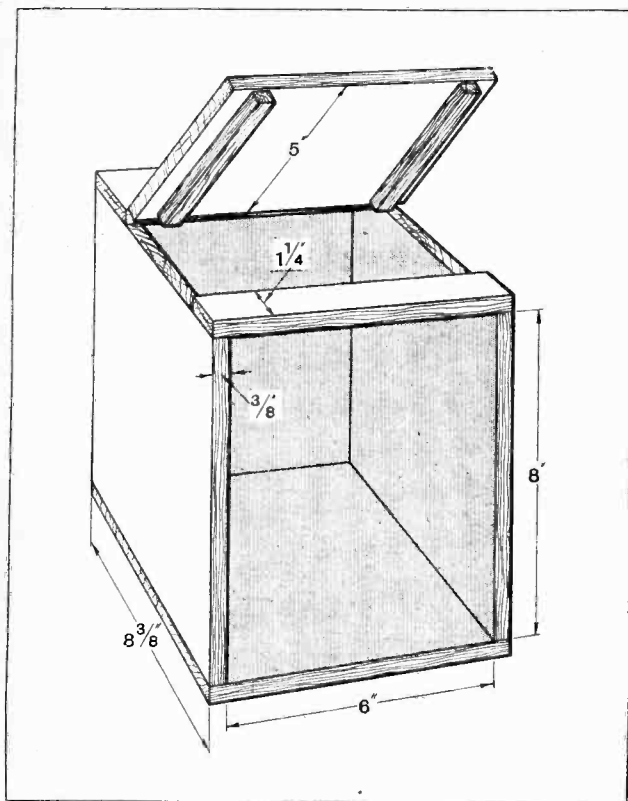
Details and leading dimensions of the cabinet. Wood of 1/4 in. thickness is used throughout.
